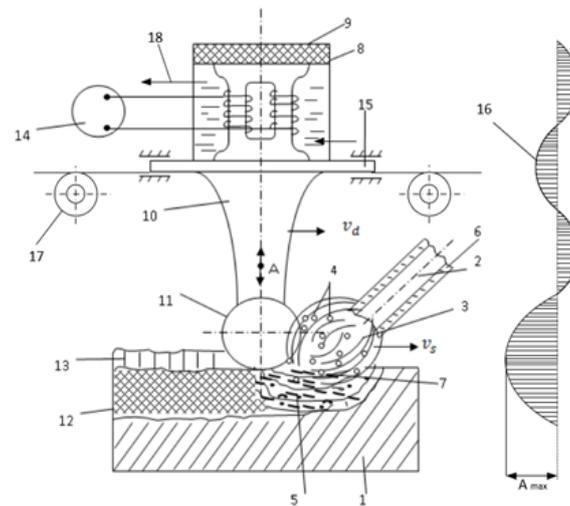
The scheme of introducing ultrasonics directly in welding bath: 1 - base material; 2 - filler material; 3 - electric arc; 4 - drops of liquid metal; 5 - welding bath; 6 - wrapper; 7 - protective layer of melted wrap ; 8 - ultrasonic transducer; 9 - acoustic insulating; 10 - ultrasonic energy concentrator; 11 - the active part of ultrasonic concentrator (sonotroda); 12 - deposited layer; 13 - wear layer; 14 - ultrasonic generator; 15 - nodal flange; 16 - variation diagram of amplitude of particle velocity along the ultrasonic system
